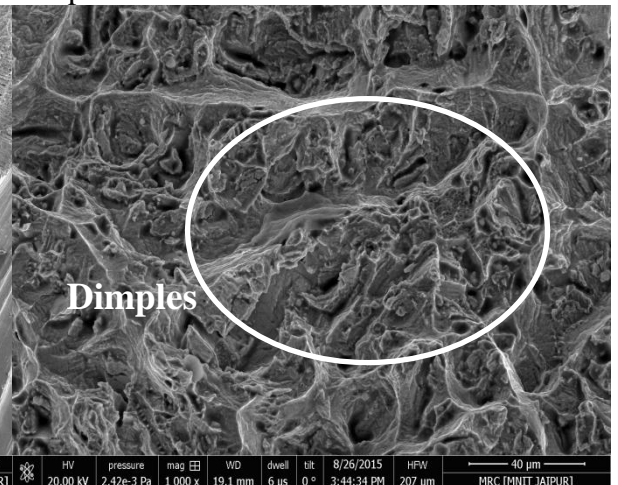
SEM fractographs for 7.5 wt.-% of CaO particulate filled SiBr alloy composites after fracture test
